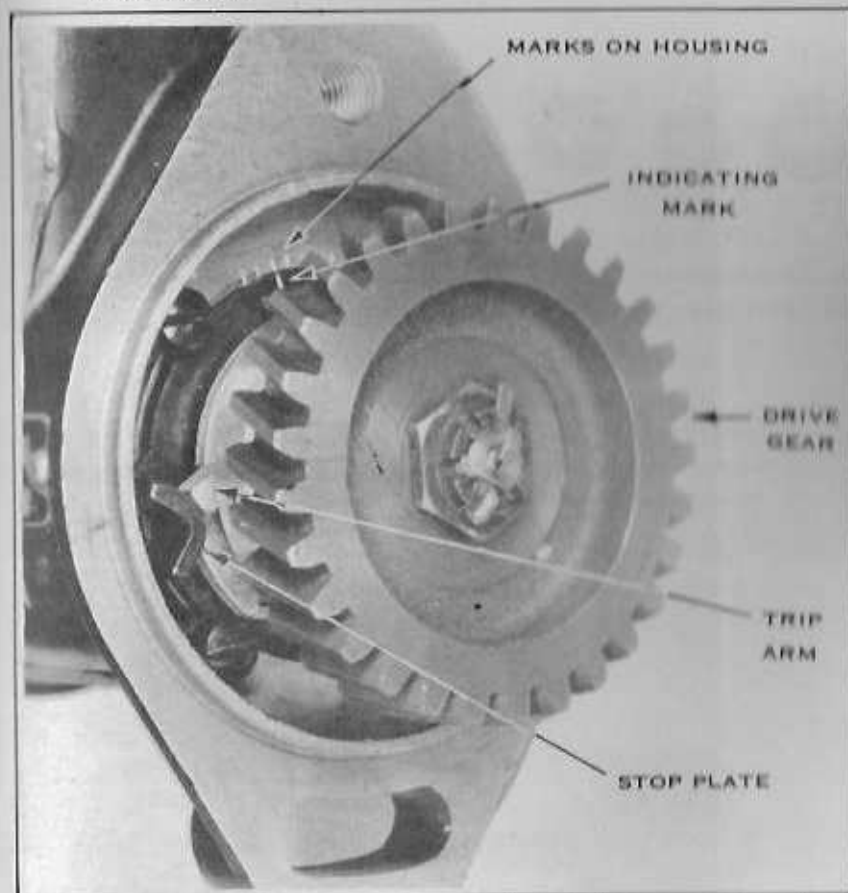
MAGNETO (SHOWING IMPULSE COUPLING)
